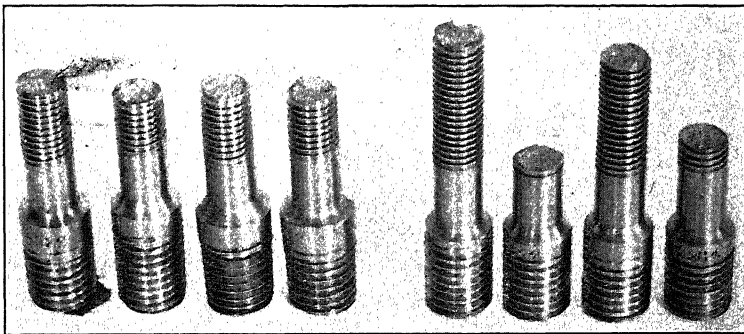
MINIATURE FORGINGS BROKEN IN CHARPY MACHINE.
